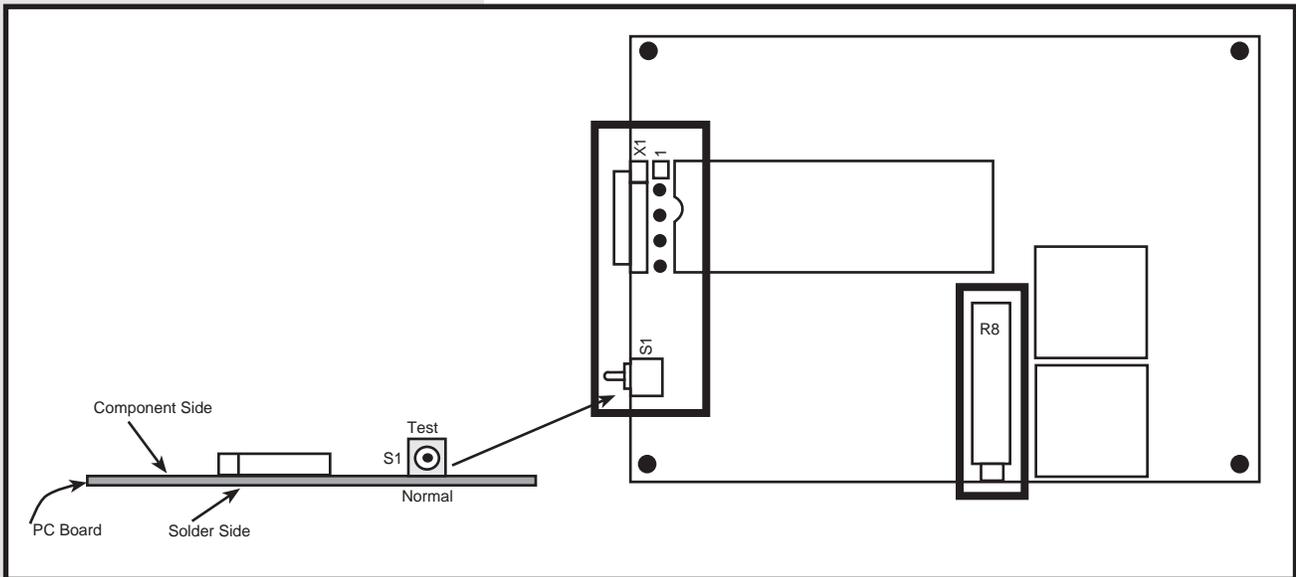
SUBASSEMBLY LOCATION ON POWER SUPPLY BOARD
